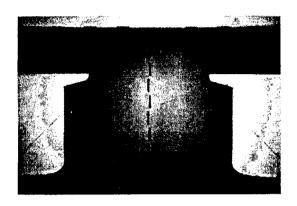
Shadow Profile of a Typical Welded Sample
